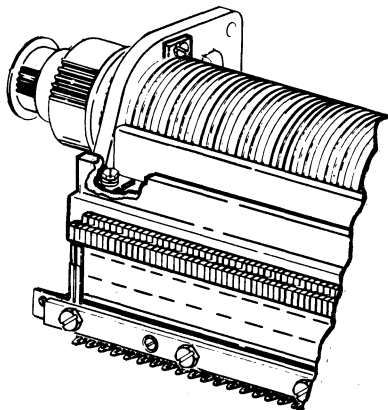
400001 Print Head Assembly (Friction and Tractor Feed – 80-Column) (Early Design)
